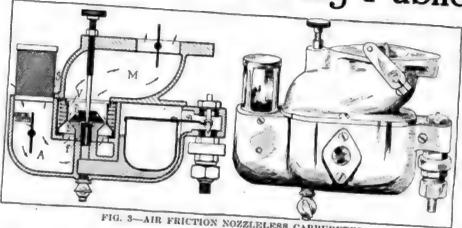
AIR FRICTION NOZZLELESS CARBURETER
